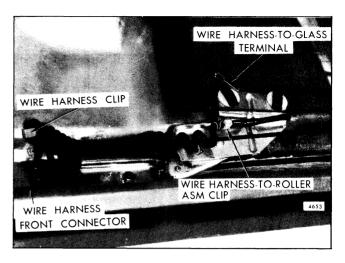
Heated Window Rear Wire Harness - Window Up (Roof Outer Panel Removed for Illustrative Purposes)
